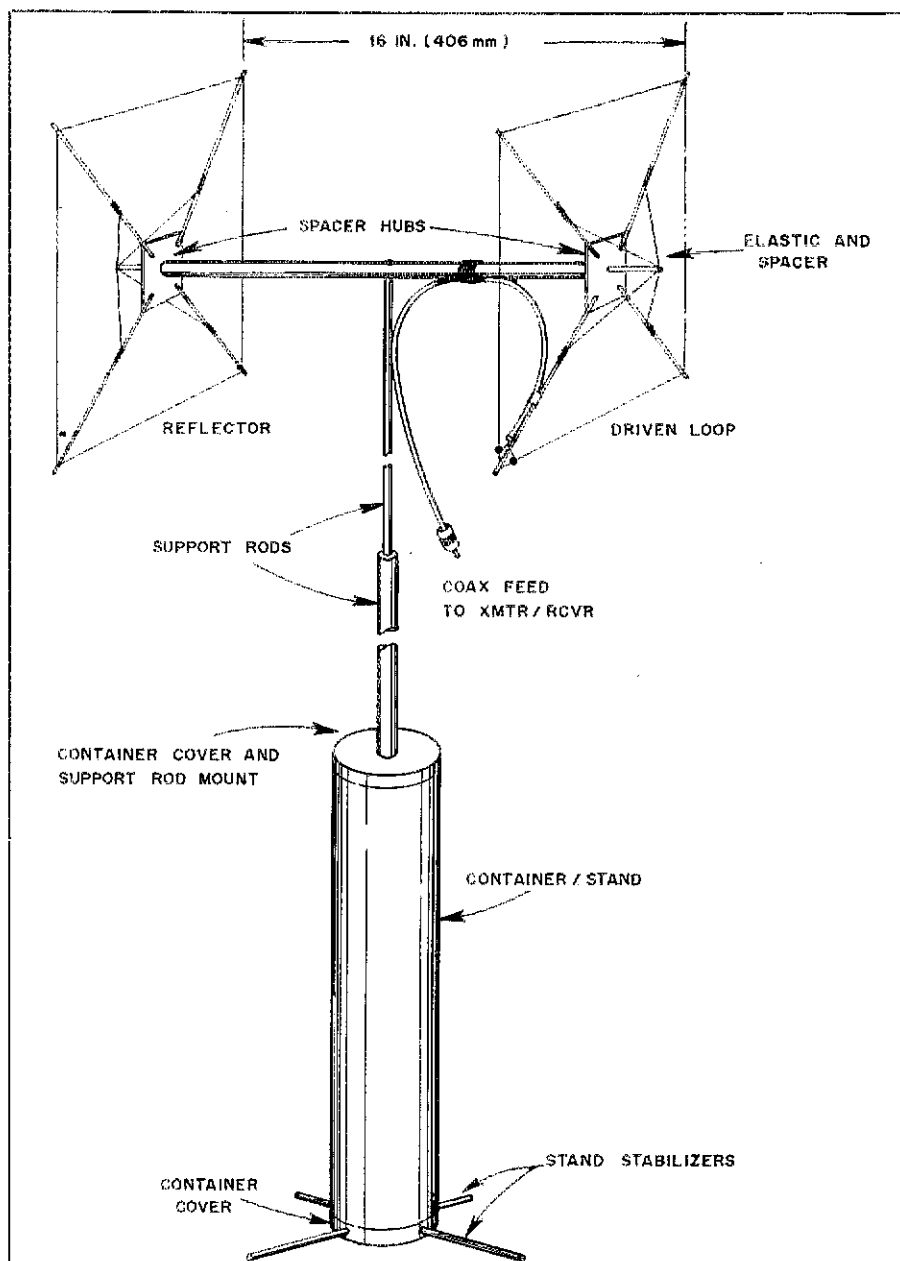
The basic portable quad assembly. The author used an element spacing of 16 in. (406 mm) so that the quad spacers would fold neatly between the hubs.
